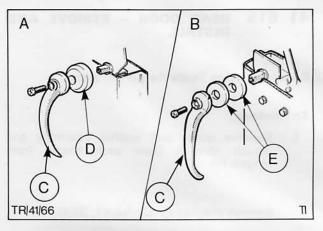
Interior handle assemblies A - Without trim panels D - Escutcheon B - With trim panels E - Washers C - Handle
